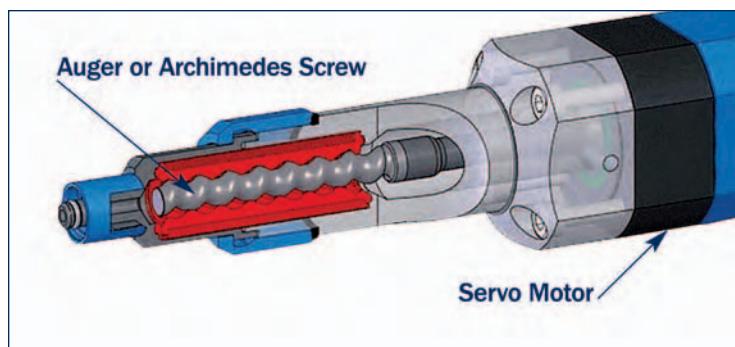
Auger Pump. Courtesy of Fluid Research Corp.
